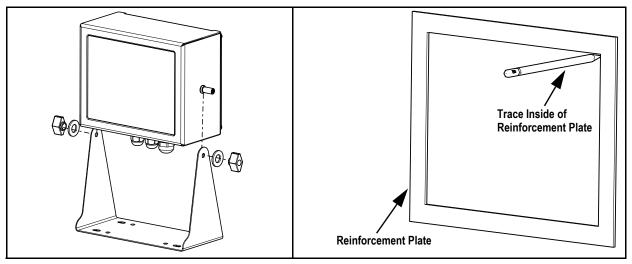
Remove Tilt Stand and Trace Cutout Lines
